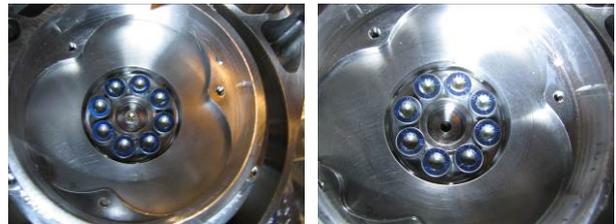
HDRA with the M3 pot screw assembled (right) and removed (left).
